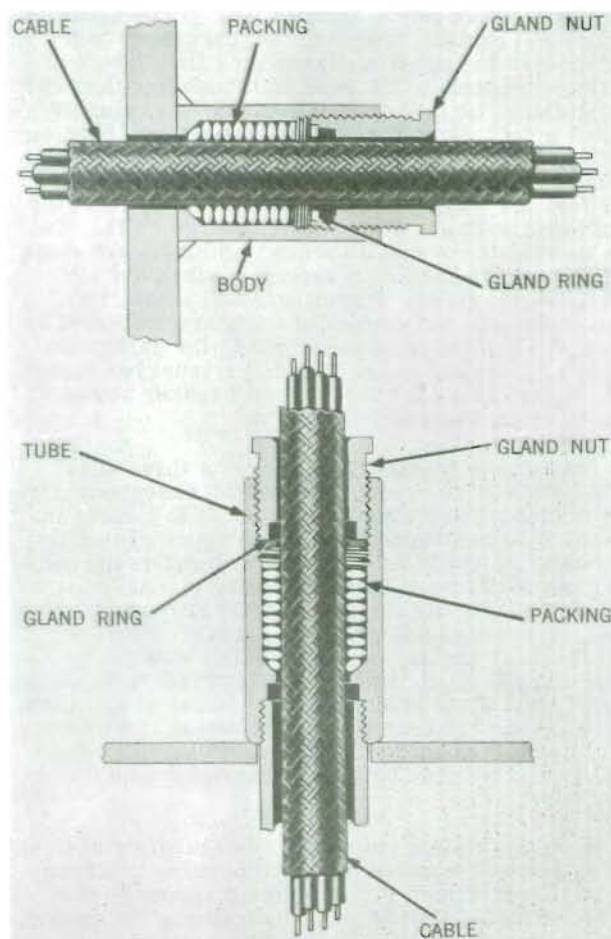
Stuffing Tubes. Typical Designs Sectioned
